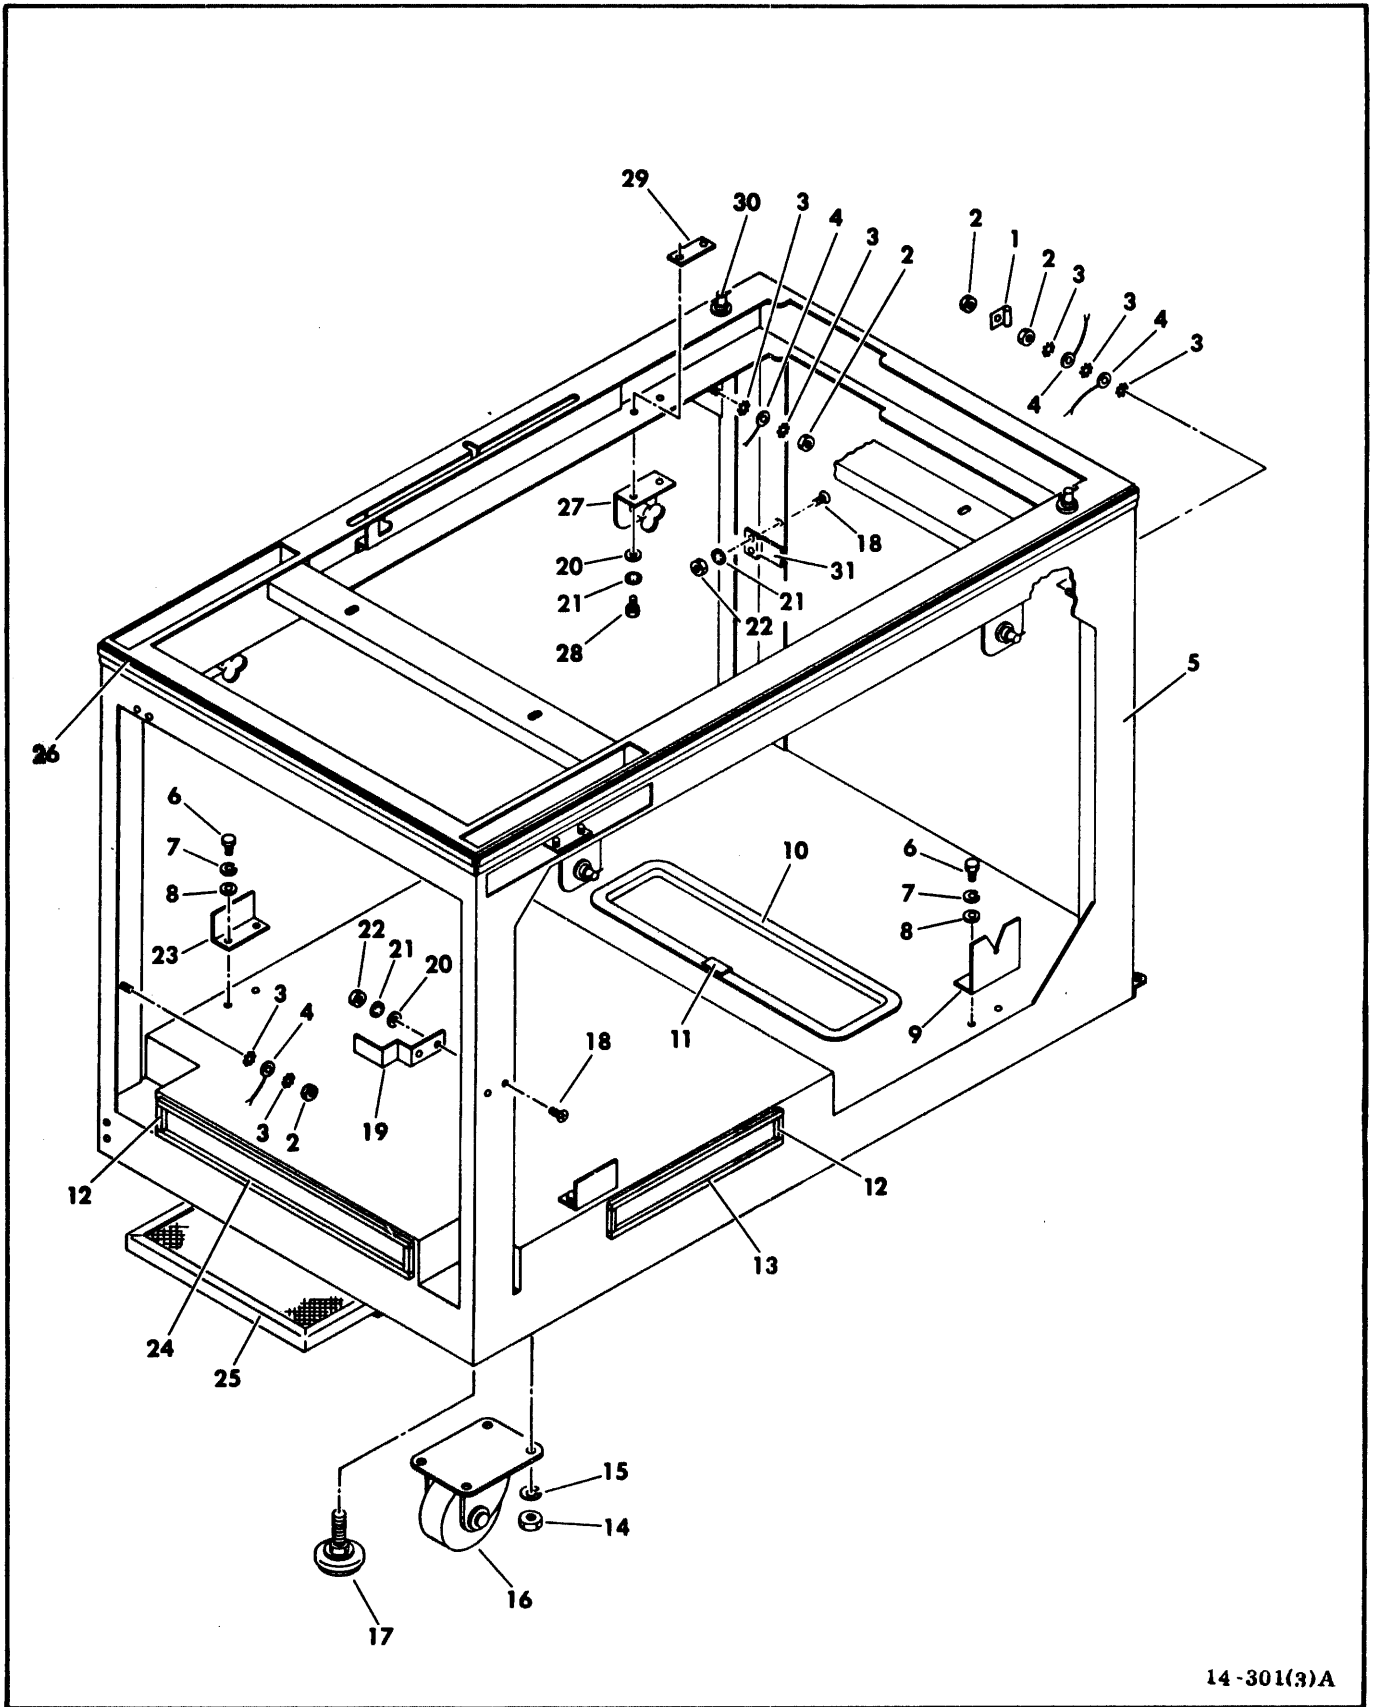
Final Assembly - Acoustic Cabinet (Sheet 2 of 2)
